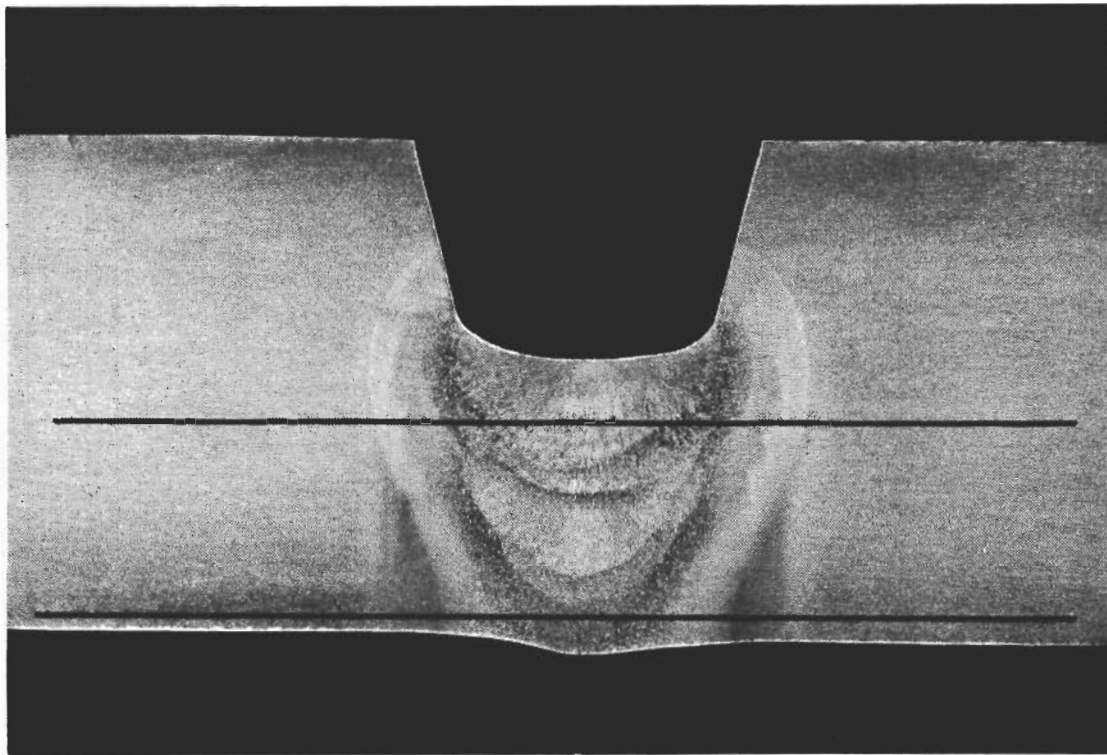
Typical Results of Macrostructure and Microhardness Evaluations of Grade 250, 1/2-In.-Thick, 18% Nickel Maraging Steel Plate Weldments Using TIG Process, As Welded, Complete Weld, Heat 120D163, Filler Wire 7C-093
